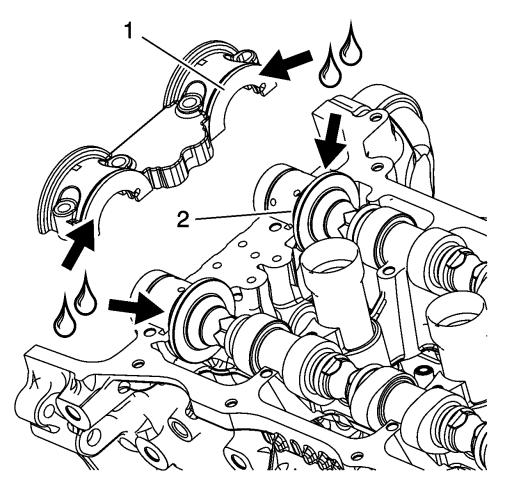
Camshaft Bearing Cap And Camshaft Thrust Surface Courtesy of GENERAL MOTORS COMPANY
